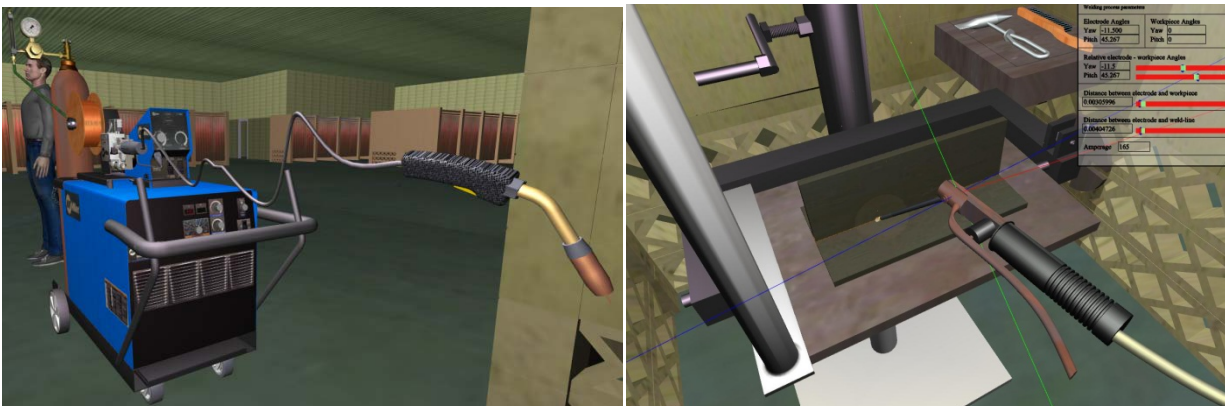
Snapshots from the VWL show a virtual welding machine for Gas Metal Arc Welding and Flux Cored Arc Welding (left) and a demonstration of virtual shielded metal arc welding of a workpiece (right).
